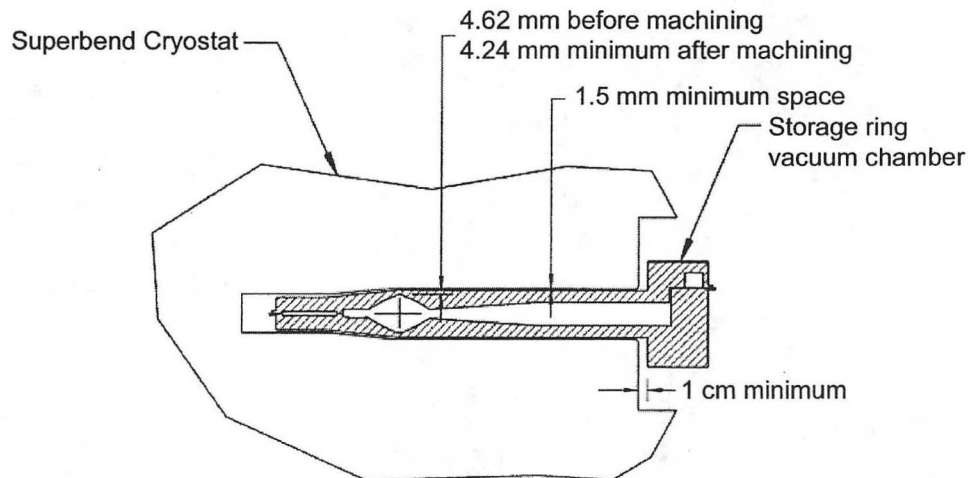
Cross-section Storage Ring Vacuum Chamber and Superbend
